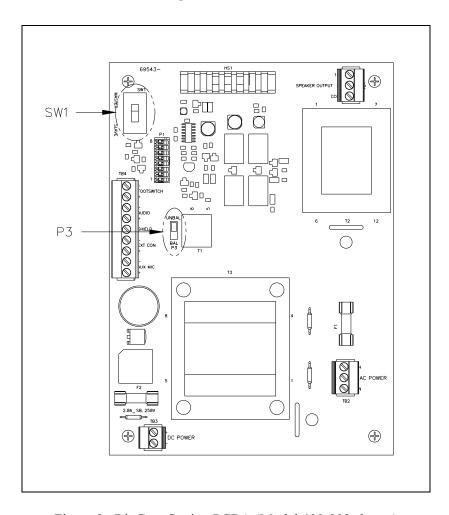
RigCom Station PCBA (Model 400-003 shown)
